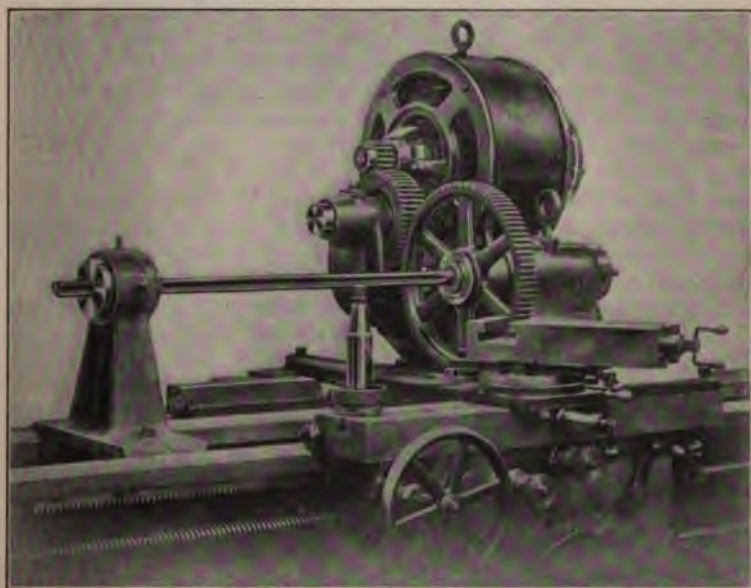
Lodge & Shipley Motor-driven Attachment for Deep Drilling in the Lathe
